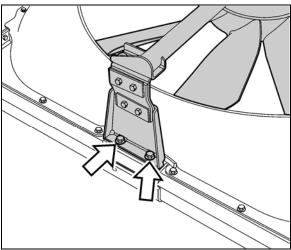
REMOVING UPPER FAN DRIVE SUPPORT BRACKET
